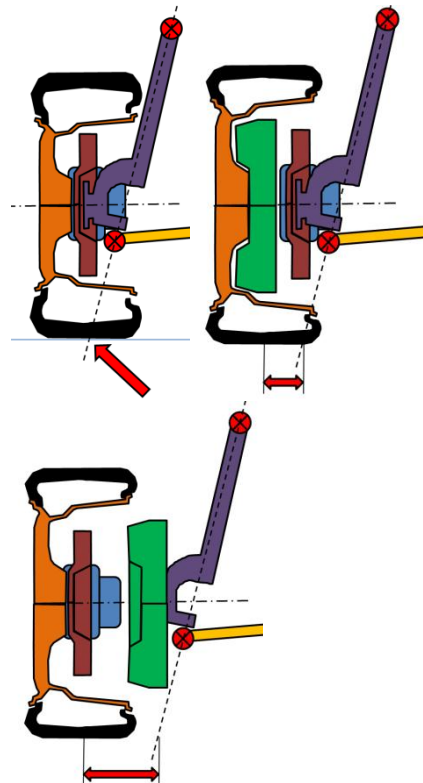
Options for packaging an in-wheel motor with a standard disc brake.
